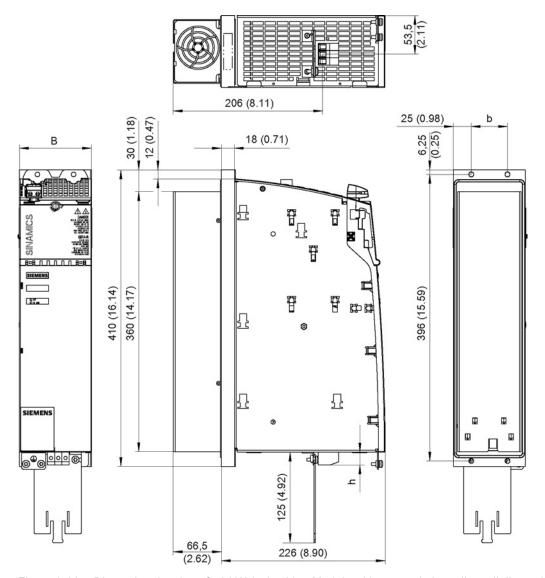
Dimension drawing of 16 kW Active Line Module with external air cooling, all dimensions in mm and (inches)
